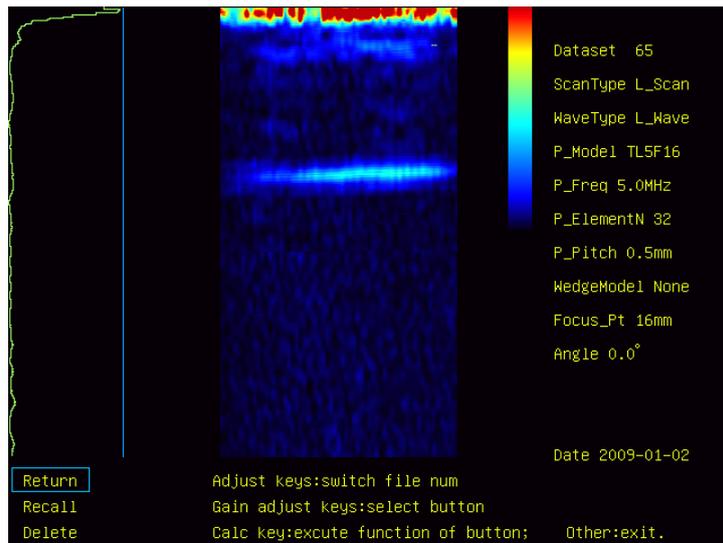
Ultrasound phased array inspection for bad fusion on heat fusion joint face
